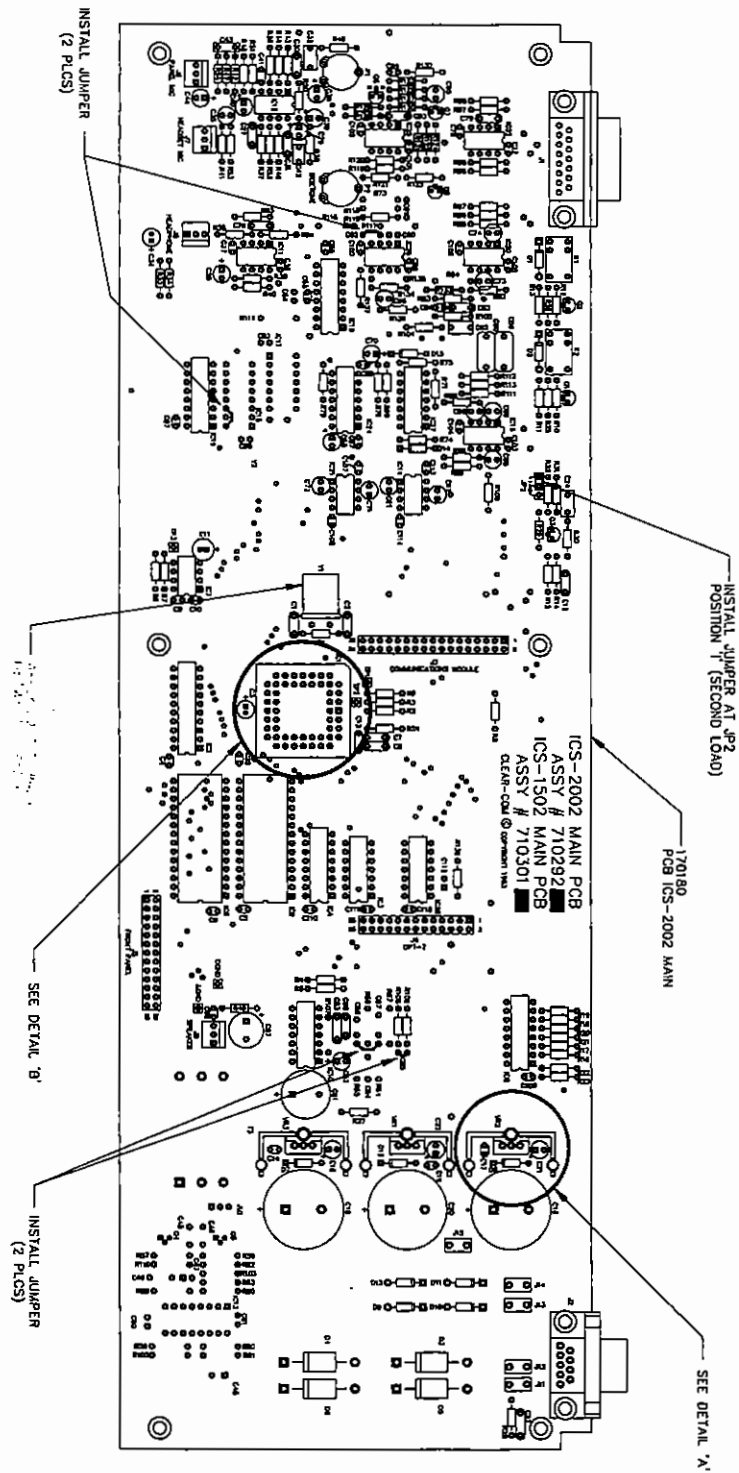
Assembly Drawing - ICS-1502 Main PCB Rev. A
